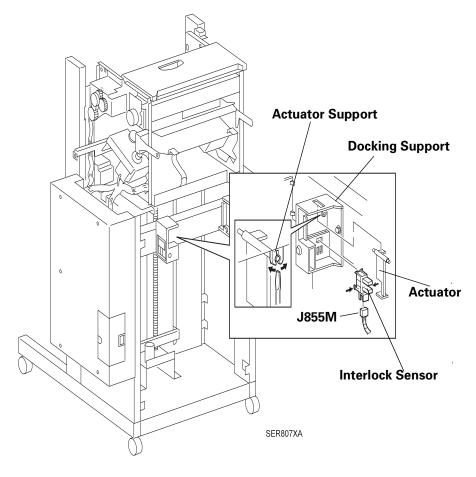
Finisher Stapler Interlock Sensor and Actuator
